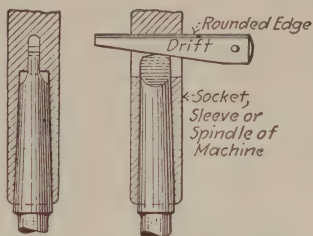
Illustrates how the taper shank with tang is held in taper hole, and also the use of the drift to remove the taper shank from the socket, sleeve, or spindle as the case may be.
